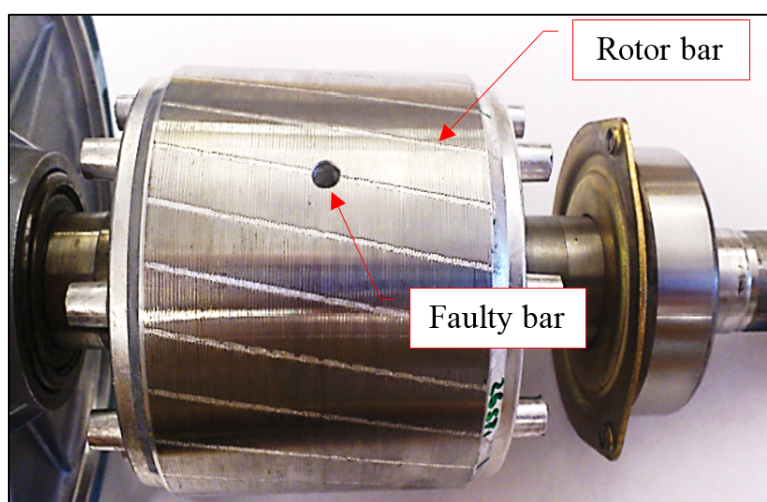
Squirrel cage of IM broken rotor bar [23].
